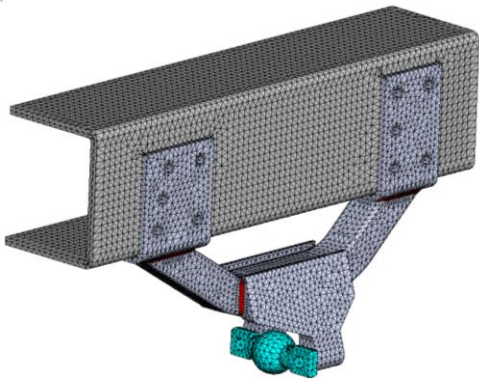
Meshed model of Proposed Parallel link bracket assembly
